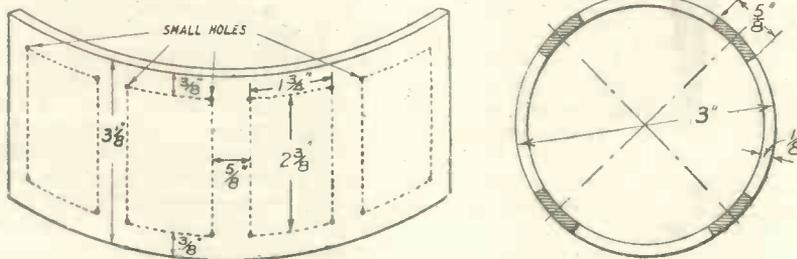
Showing ebonite tube drawn as if "opened out" to give dimensions. On the right, an end view.
